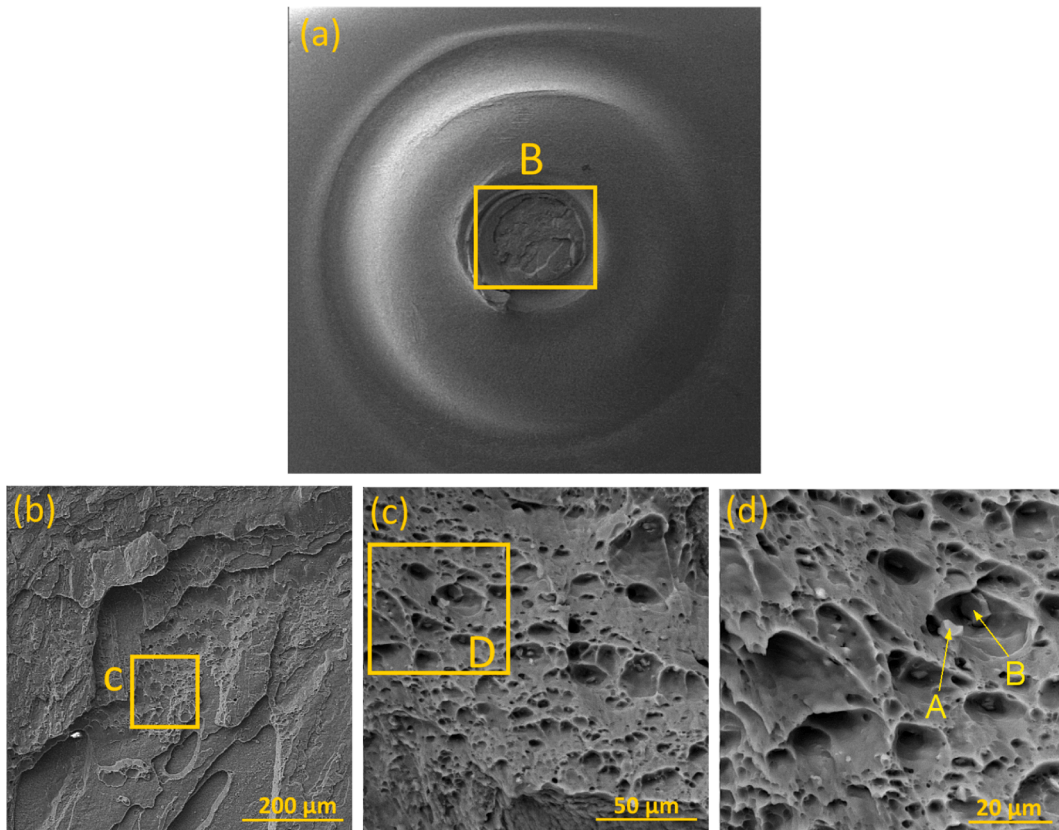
Fracture SEM-SE images of AA2024-T3/AA5754-O weld (5754 side).
